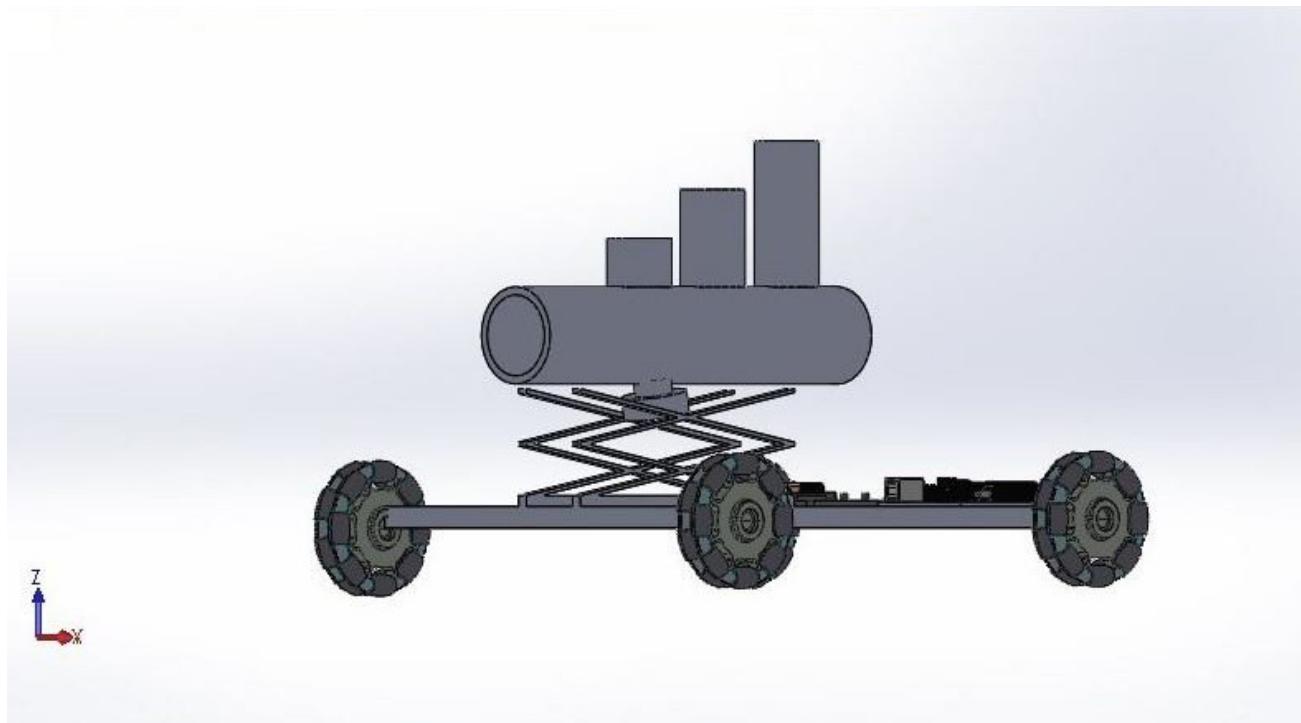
CAD drawing of Idea 2. Detailed views in [D.4](#)
